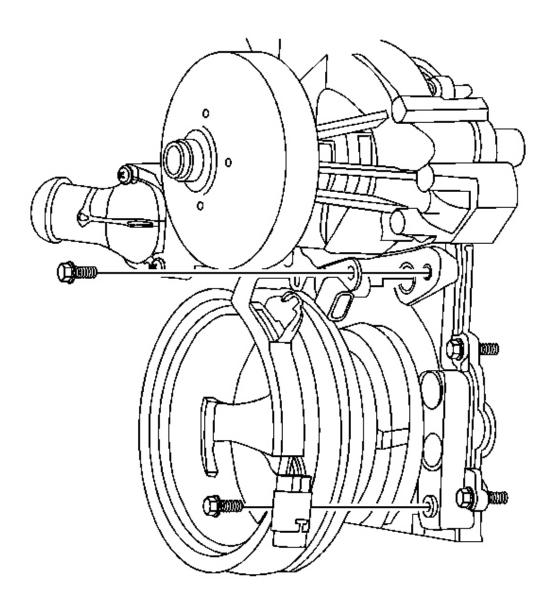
Camshaft Sensor Bolt & Sensor Courtesy of GENERAL MOTORS CORP.
